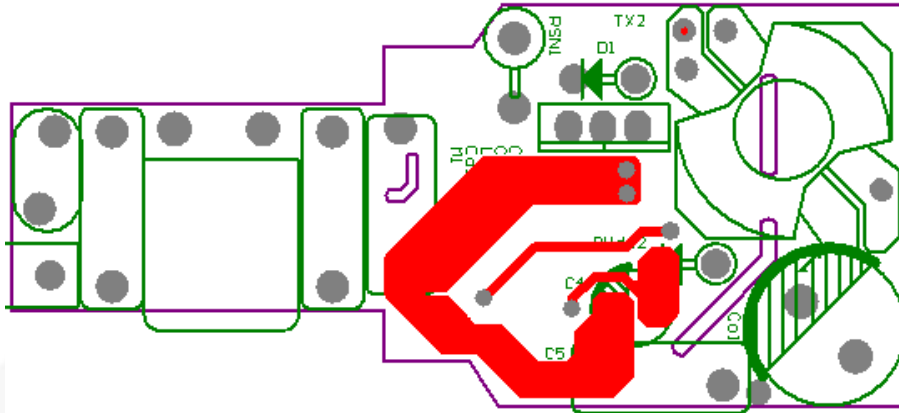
PCB(Printed Circuit Board) Top pattern of reference board
